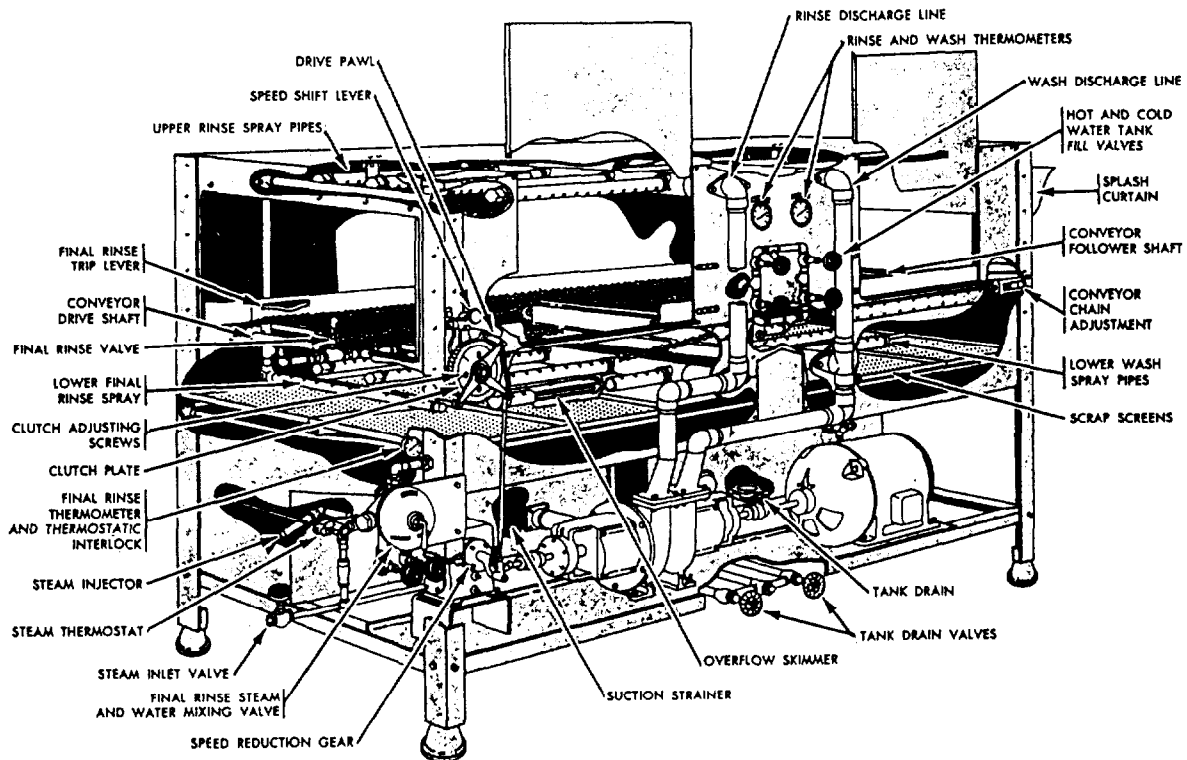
Cutaway view of a double-tank automatic dishwasher.
